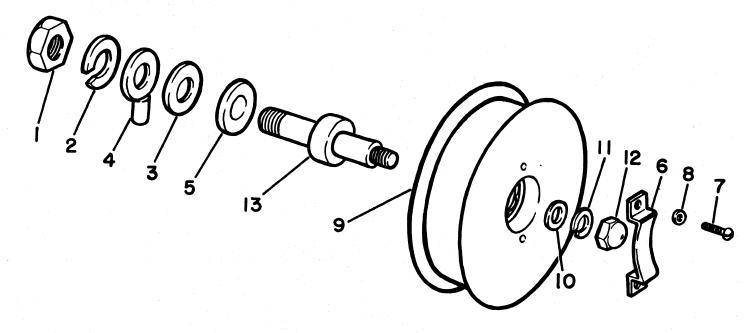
500 107 00 AND 500 108 00 LARGE TAPE IDLER ASSEMBLIES-EXPLODED VIEW
